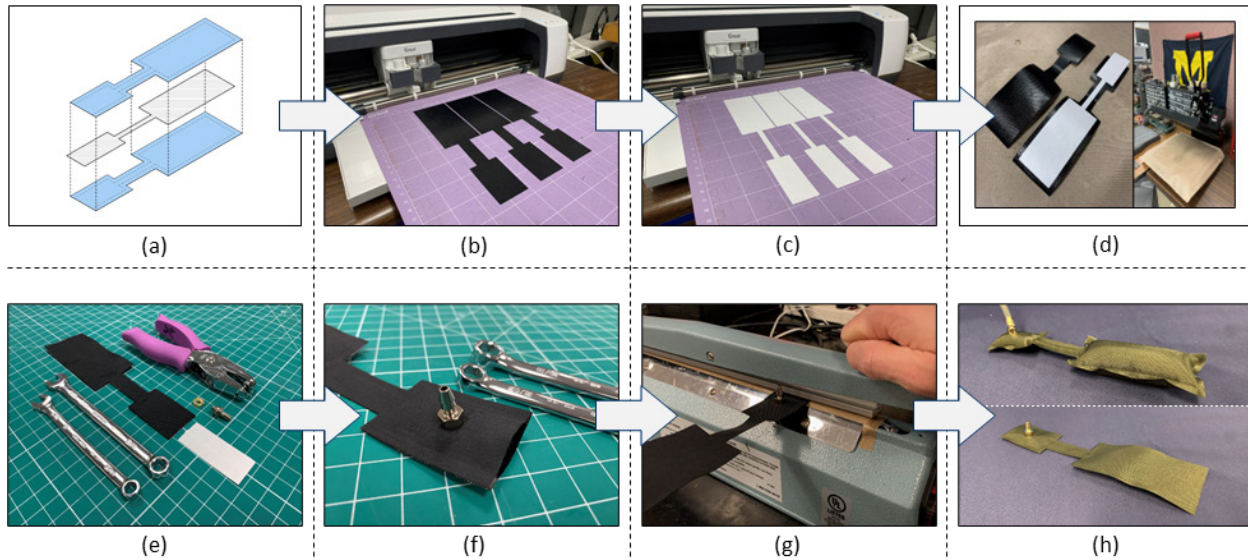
An example fabrication process of a proto-cell using masked heat-sealing method. (a) The design of the proto-cell layers is created in Rhinoceros, including the details of the masking layer pattern. (b) The large thermoplastic sheet (e.g., TPU coated nylon) is cut into two identical skin layers using a desktop CNC plotter. (c) The masking layer is cut from a non-thermoplastic material such as glassine paper. (d) The layup, consisting of the bottom skin layer, masking layer with an extension, and top skin layer, is placed on the bottom platen of the heat press machine and covered with a PTFE fiberglass sheet before being heat-pressed. (e) After cooling, the extension of the masking layer is removed, providing access to the inner area of the proto-cell through the designated edge. (f) A barbed pneumatic fitting is attached to the top skin layer around the designated area with a hex nut through a 1/8-inch punched hole. (g) The remaining edge is sealed using a heat press machine or manual heat-sealing tool such as a hand iron or linear impulse sealer, (h) completing the fabrication of the proto-cell.
